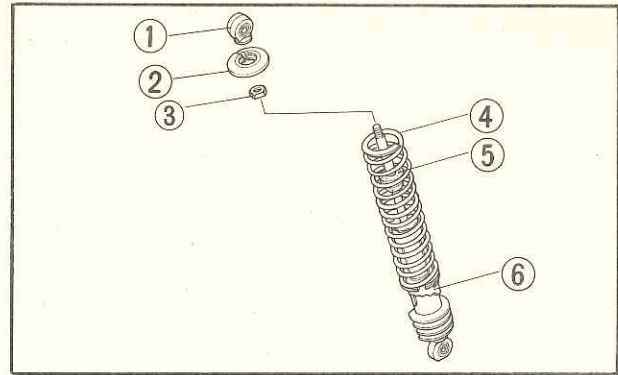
(1) Upper joint (4) Rear shock absorber spring
